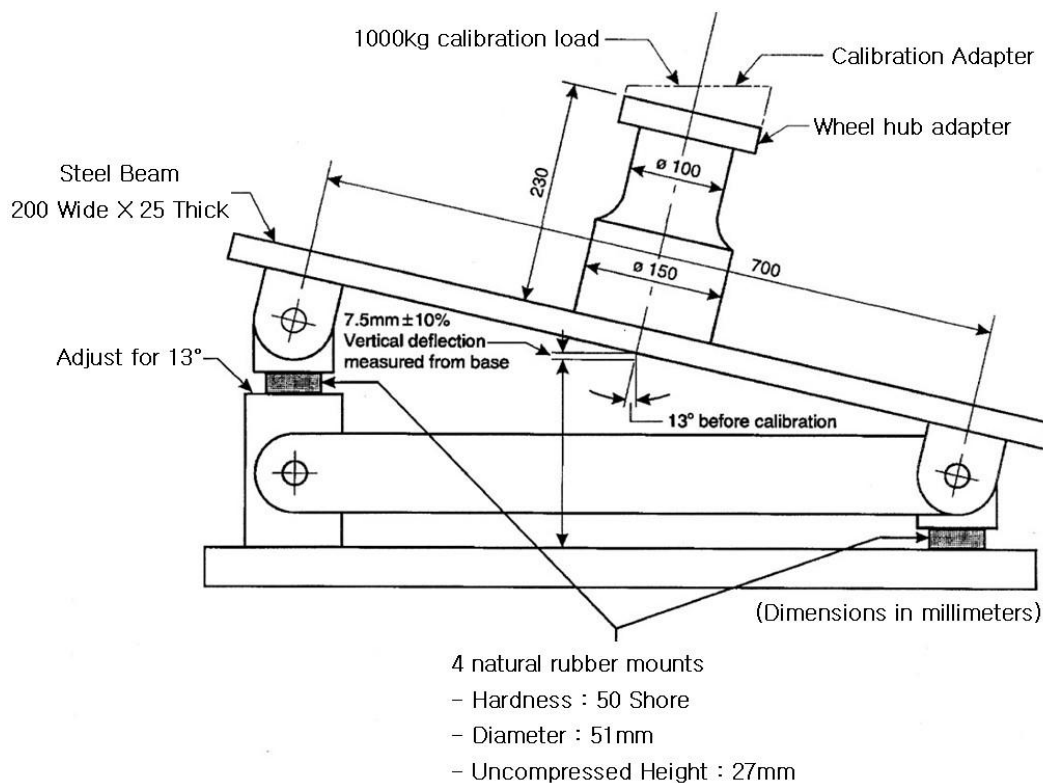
The Specifications of The Aluminum Wheel Impact Test Jig
